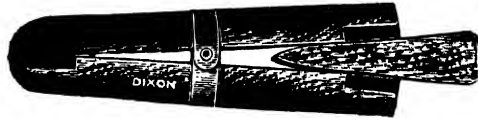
Ring vise clamp. (Courtesy William Dixon Co.).
